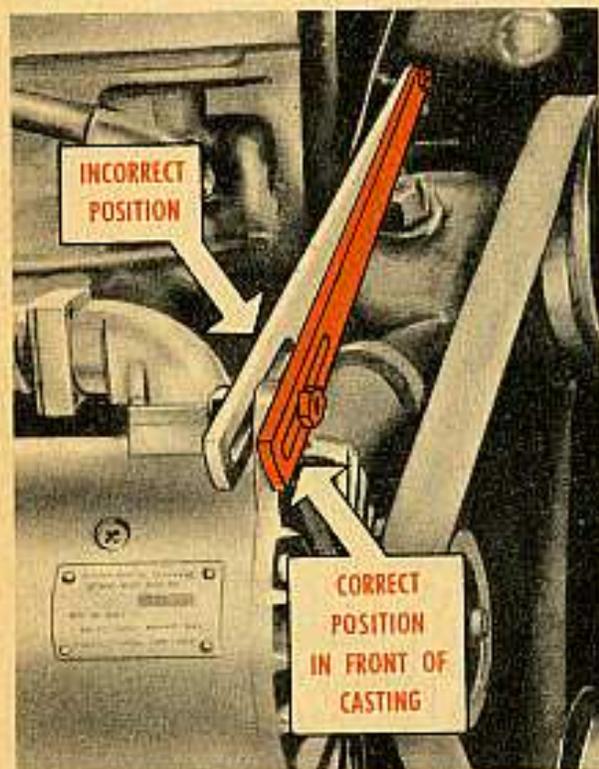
A misplaced adjusting-arm'll break the M135's generator-end-castings, for sure.
